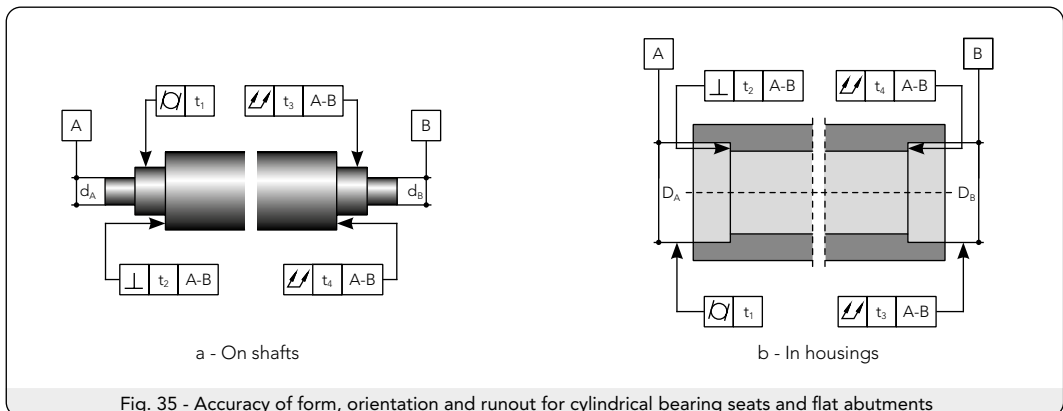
Accuracy of form, orientation and runout for cylindrical bearing seats and flat abutments
